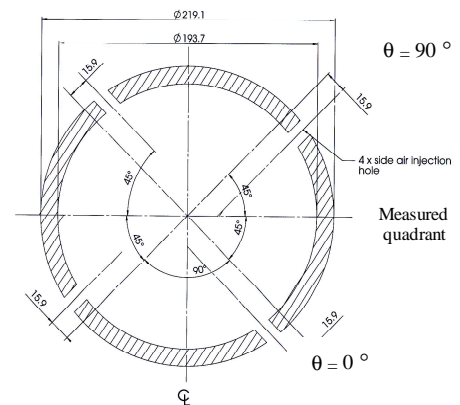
Section View of the Combustor at $z/D= 0.2$ Depicting the Side Air Injection Holes (All dimensions in mm.)
